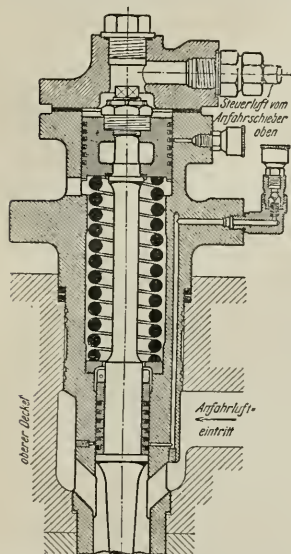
STARTING VALVE OF THE UPPER PART OF THE CYLINDER OF THE DOUBLE-ACTING TWO-STROKE-CYCLE ENGINE
